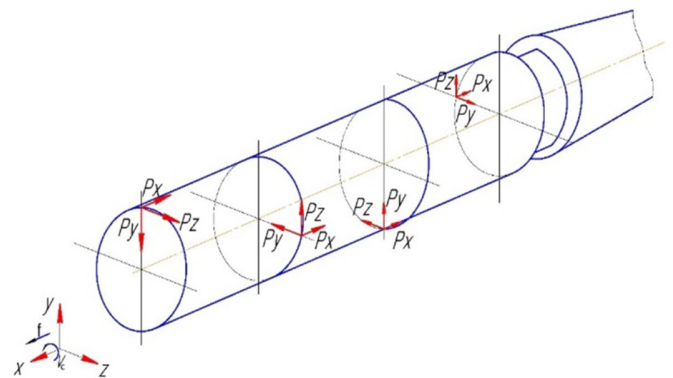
Cutting forces acting on a modular cutter-type reamer in three-dimensional space.
